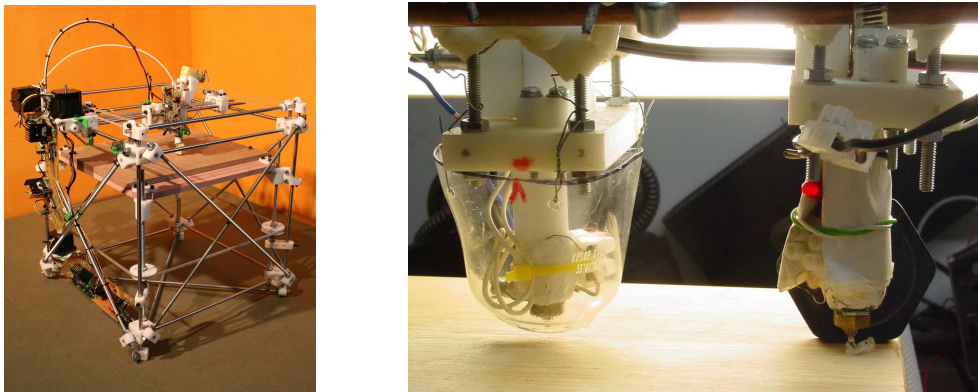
The left-hand photograph shows Version 1.0 (“Darwin”) of the RepRap machine. The photograph on the right shows a print-head-printed print-head printing. The left-hand head was made on a commercial 3D printing machine. The right-hand head was made by the left-hand head and is shown starting to print for itself.
